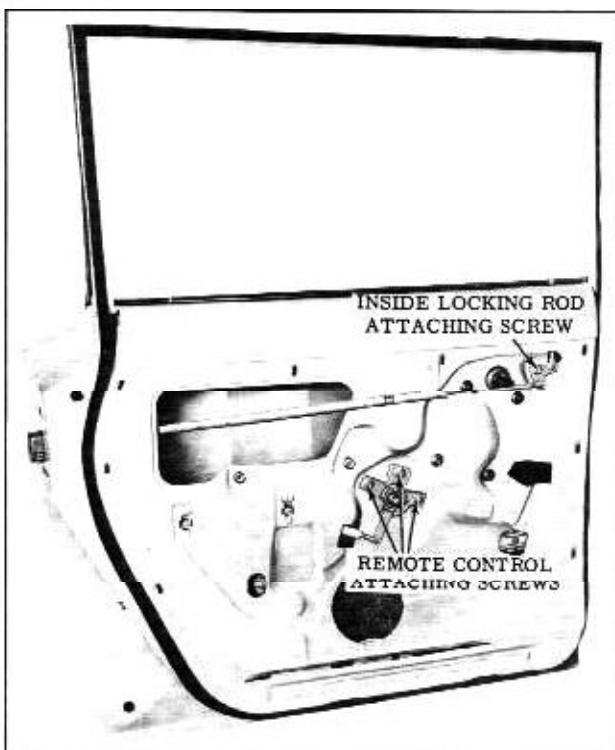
Rear Door Remote Control and Inside Locking Rod Attachment
